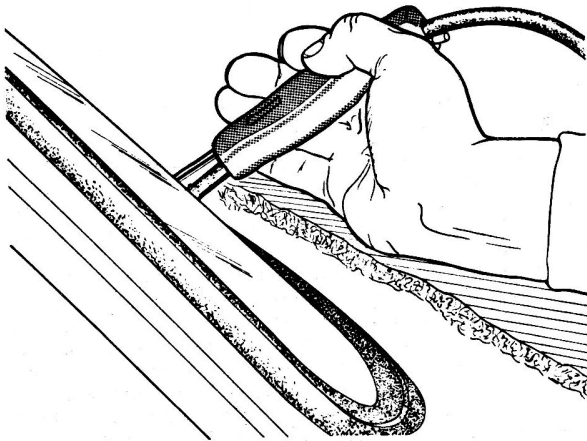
Using tool 'B' to insert the windscreen sealing rubber
